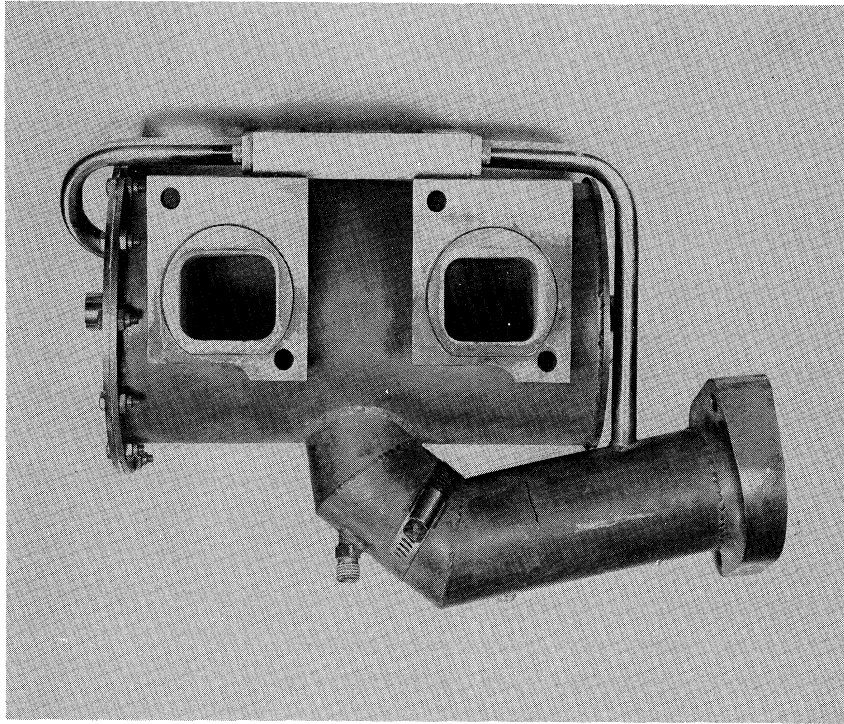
WAD reactor assembly—viewed exhaust port side.
